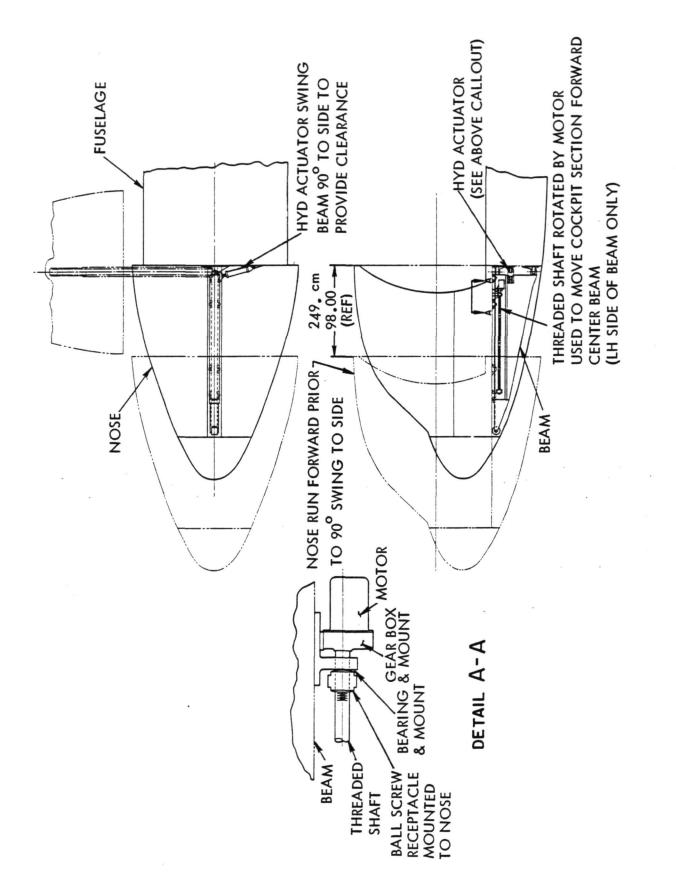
Schematic – Cockpit Section Hinge Mechanism
